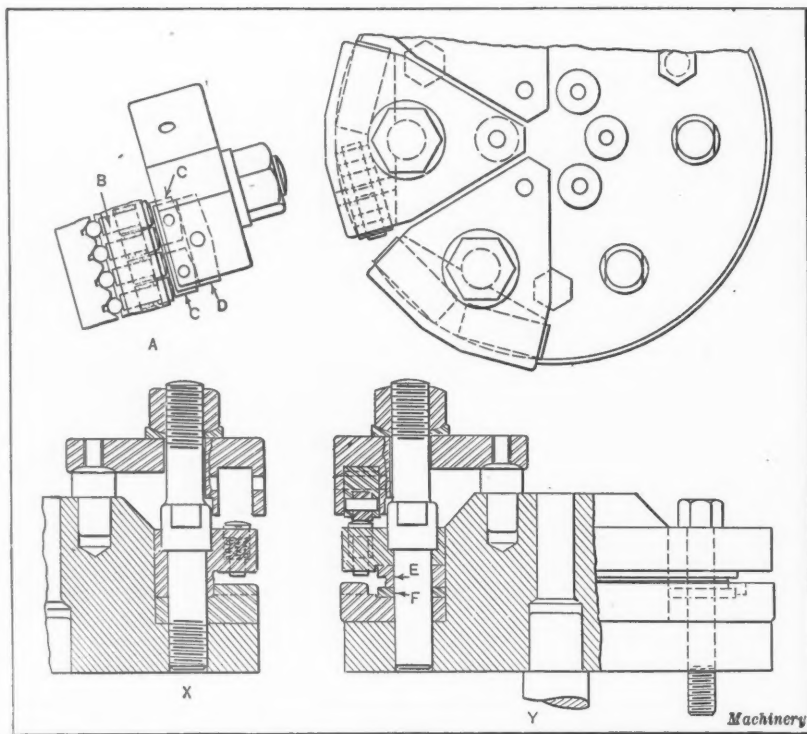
Two Rotary Fixtures that carry the Roller Pins past the Milling Cutters during the End Slabbing Operation
